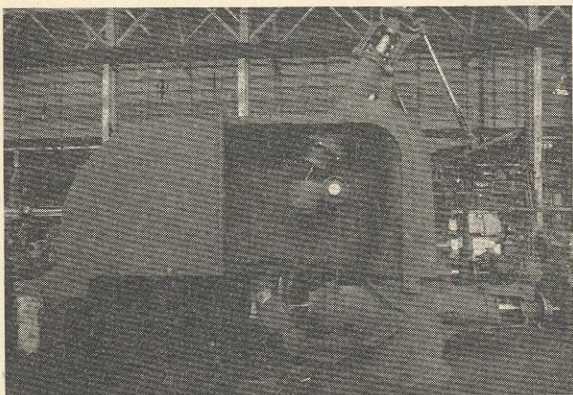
HOUSING AND NOZZLE ARRANGEMENT FOR A DOUBLE NOZZLE WHEEL
